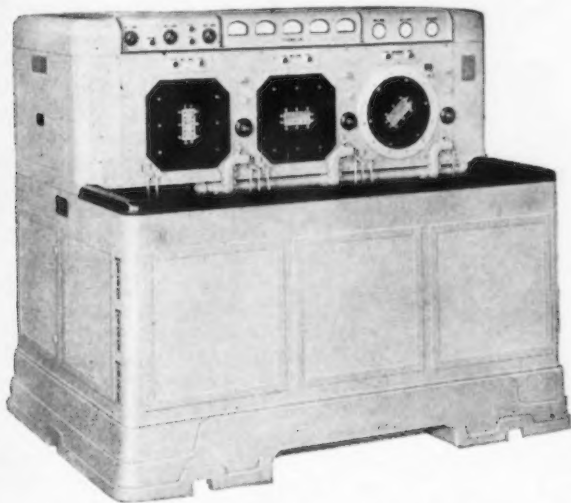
Completed TOCCO Induction Heating Machine with former base.
